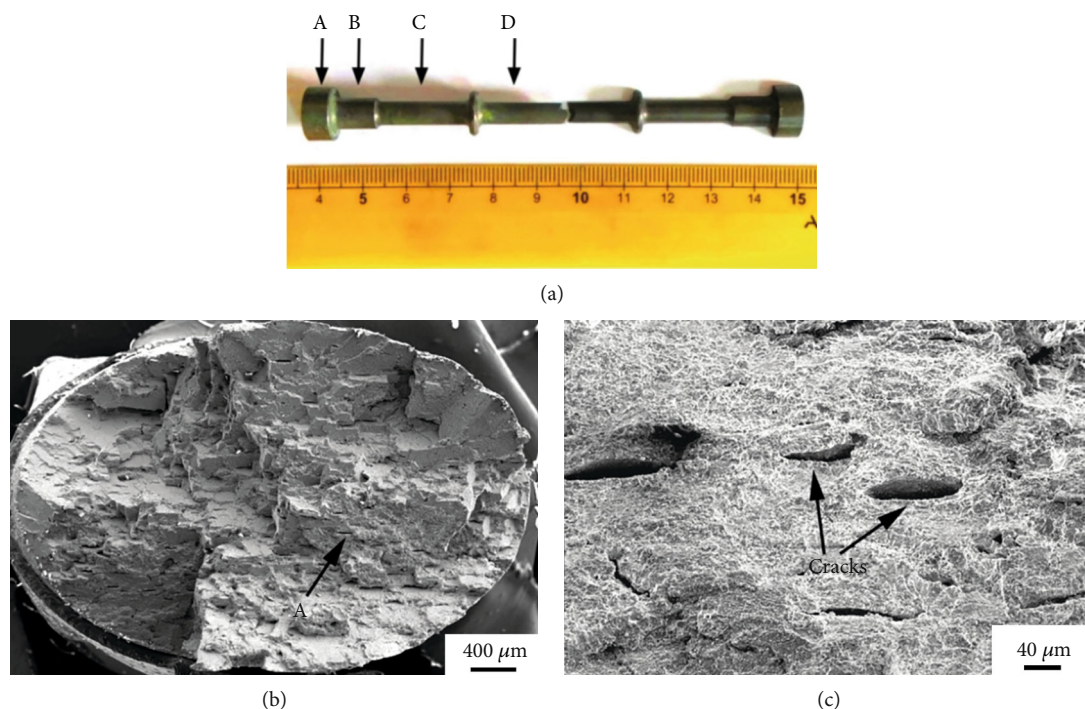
Sample photo and SEM images of the fracture morphology of the single crystal alloy IC6SX with [001] orientation after being crept for 56.3 h and then up to fracture at 850°C/450 MPa. (a) Fracture specimen photo; (b) low multiple fracture morphology; (c) partial enlarged image of position A from (b).
